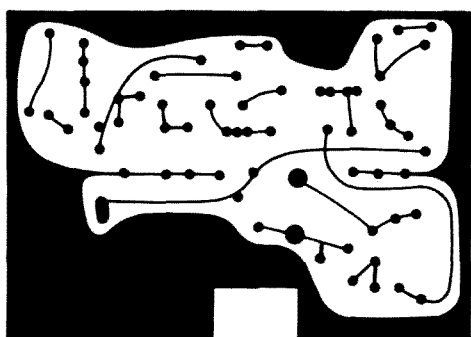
Printed circuit board and layout. Refer to Fig. 1 and text for parts values.
